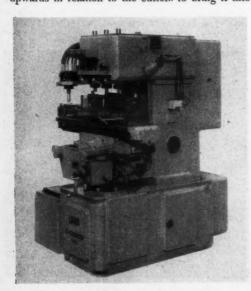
This Hayes Tracemaster type TM. 43-3D machine is equipped with a 3-spindle cutter head and was supplied for copy milling compression cavities in cylinder heads
